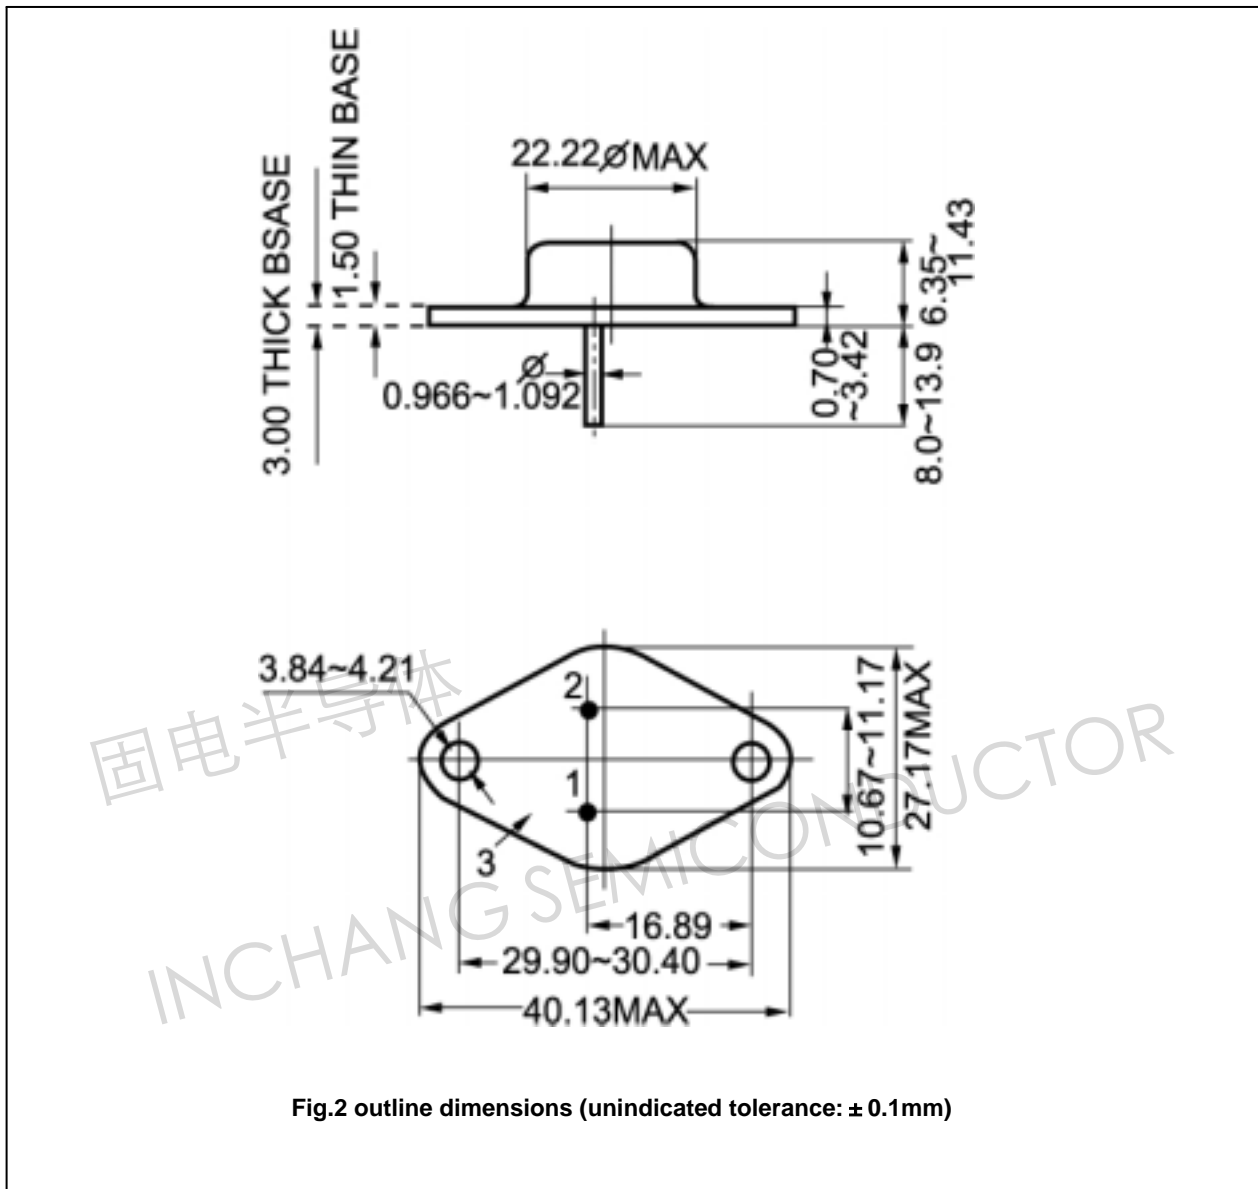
outline dimensions (unindicated tolerance:  $\pm 0.1\text{mm}$ )
